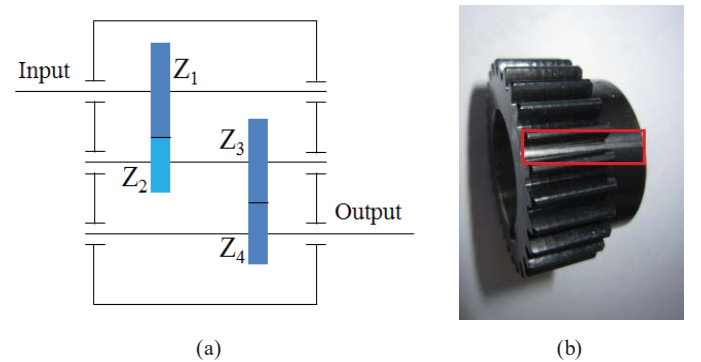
Internal structure of parallel shaft gearbox and gear fault part in experiment: (a) Structural sketch of parallel shaft gearbox; (b) Gear with root crack fault
